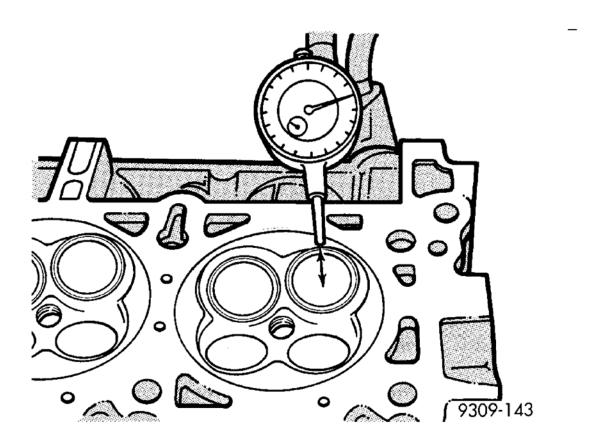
Measuring Valve Guide Wear Courtesy of CHRYSLER LLC
